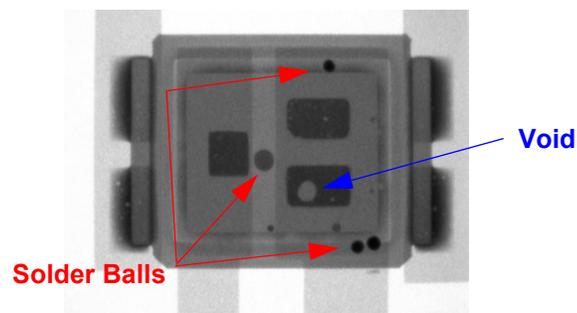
X-Ray Inspection of DirectFET Assembly: Defects
